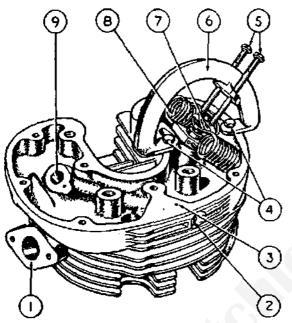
SPECIAL TOOL FOR VALVE-SPRING REMOVAL.
